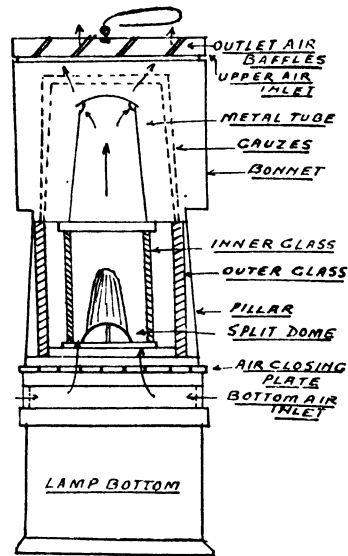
Hailwood Improved Combustion-tube Safety-lamp.
